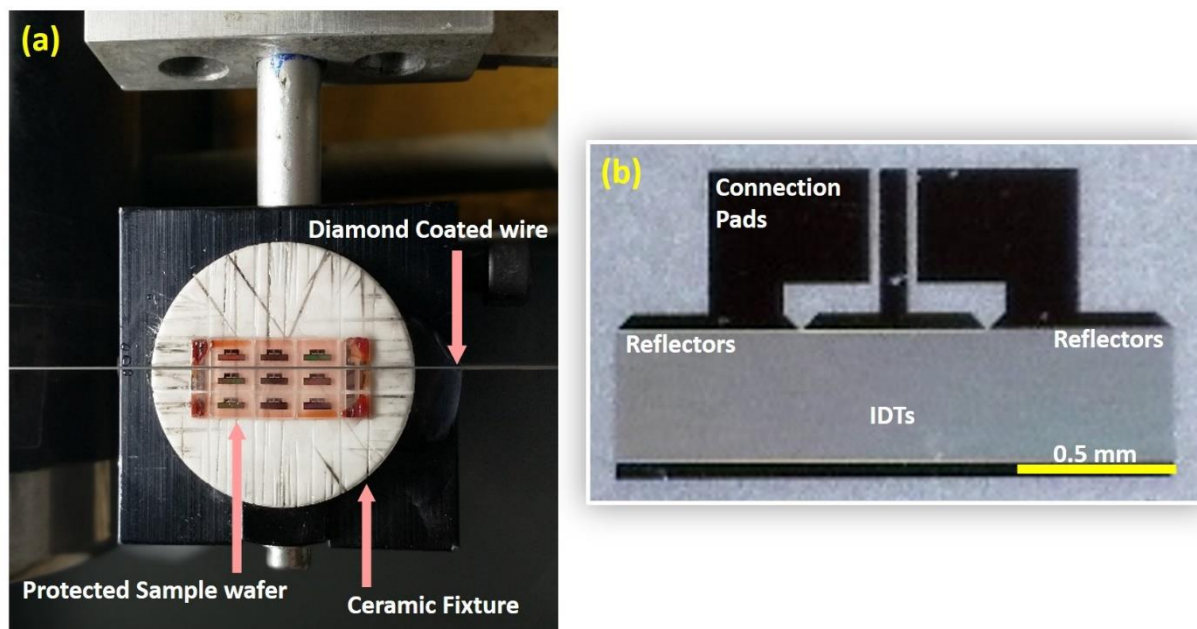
(a) Wire-cutting setup for cutting out single device from wafer. (b) single device after cutting.
